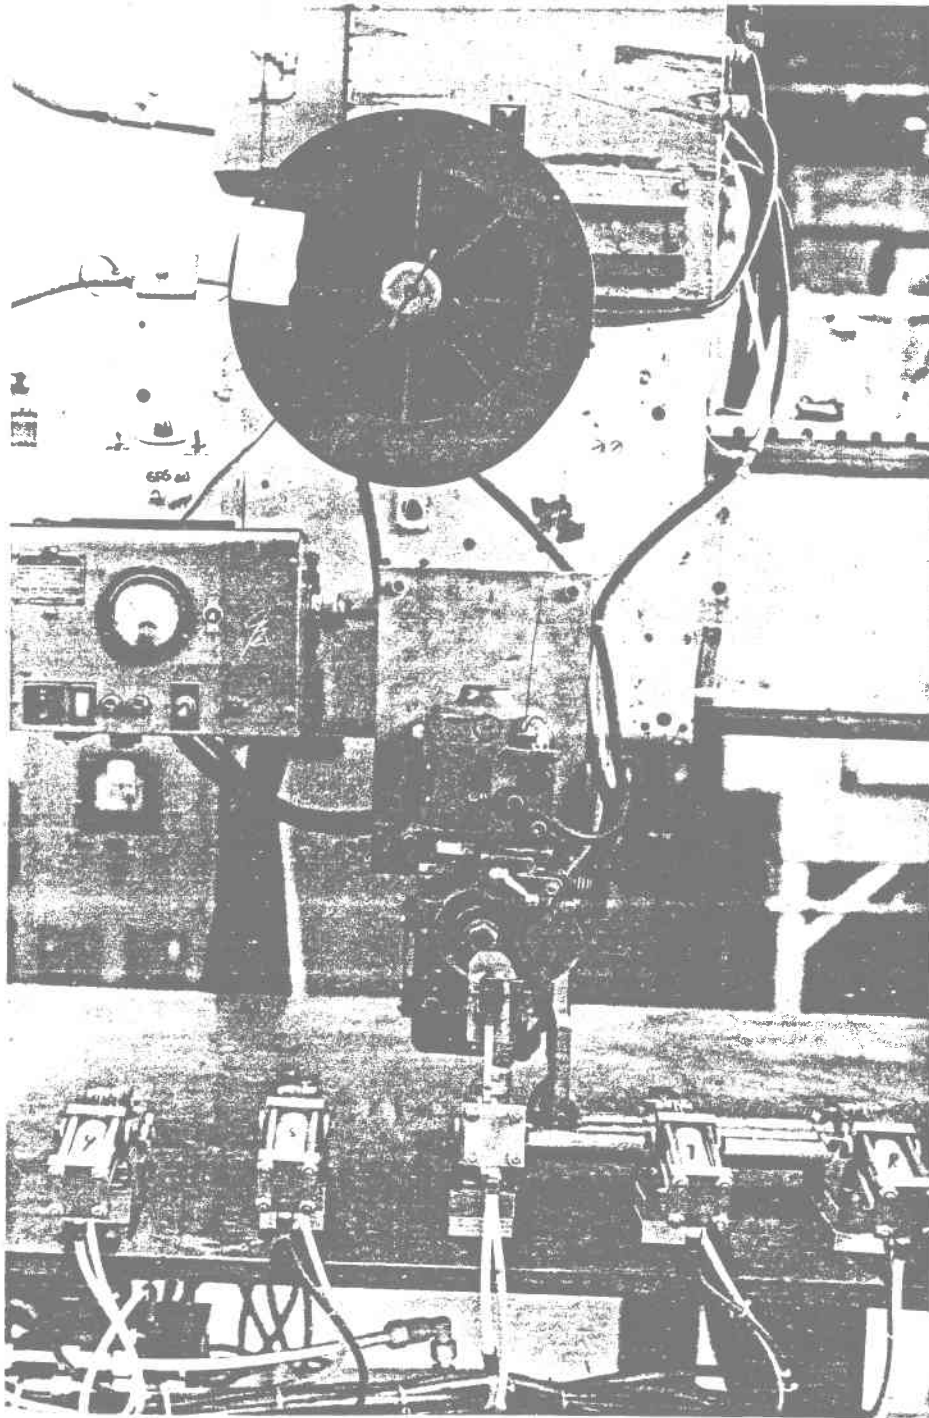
Welding Head With Wire Reel and Controls
